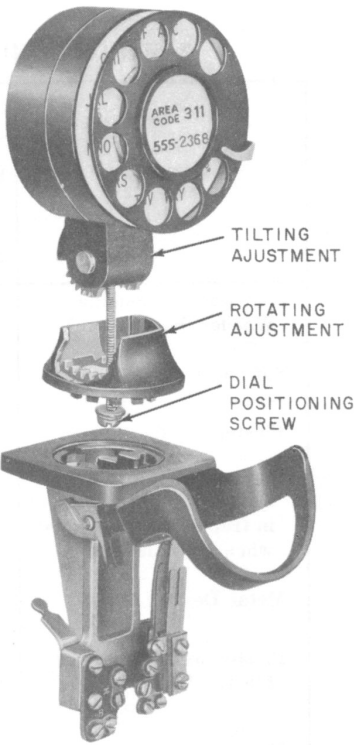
Positioning Adjustments of 43A Dial Mounting
